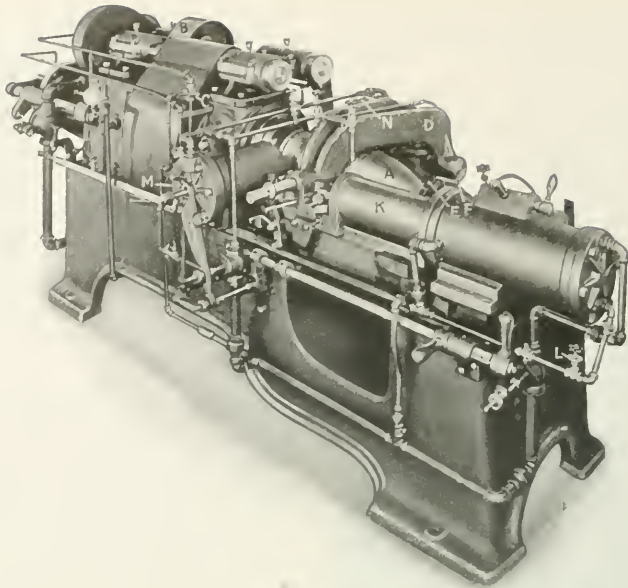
Partial End View of Warren "Hydraulic" Lathe for Large Shells
